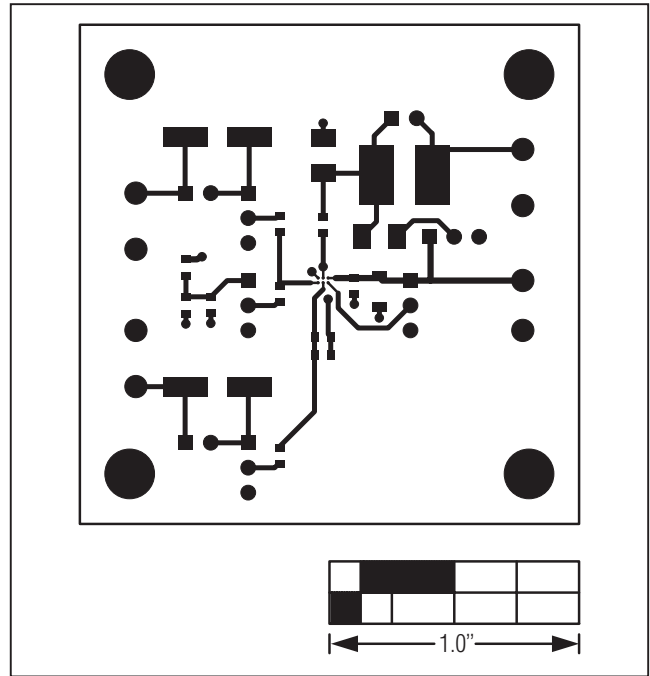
MAX4231 EV Kit PCB Layout—Component Side
